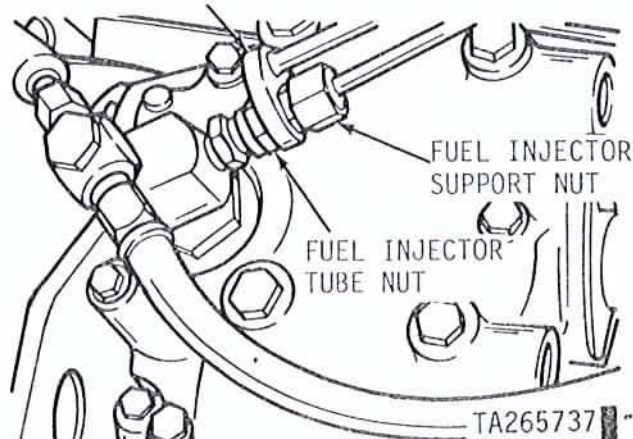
Disconnecting or connecting fuel injector tube nuts.
